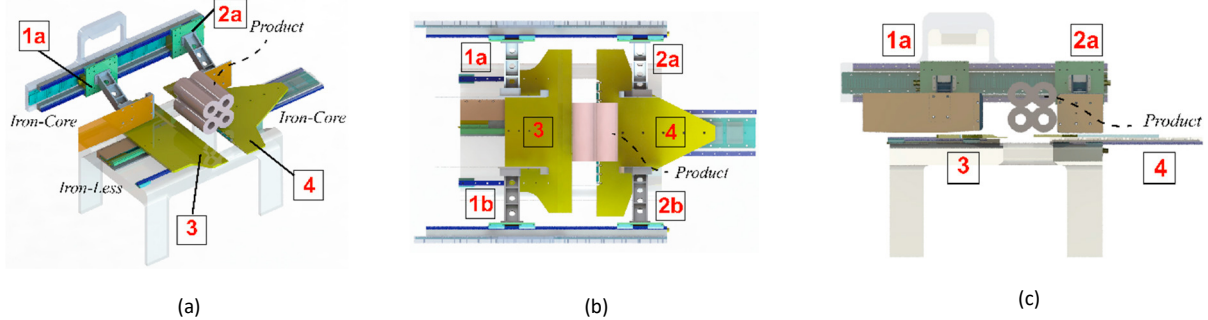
Design #B*: CAD drawings of the second LEM-based solution: (a) 3D view, (b) top view, (c) lateral view.
